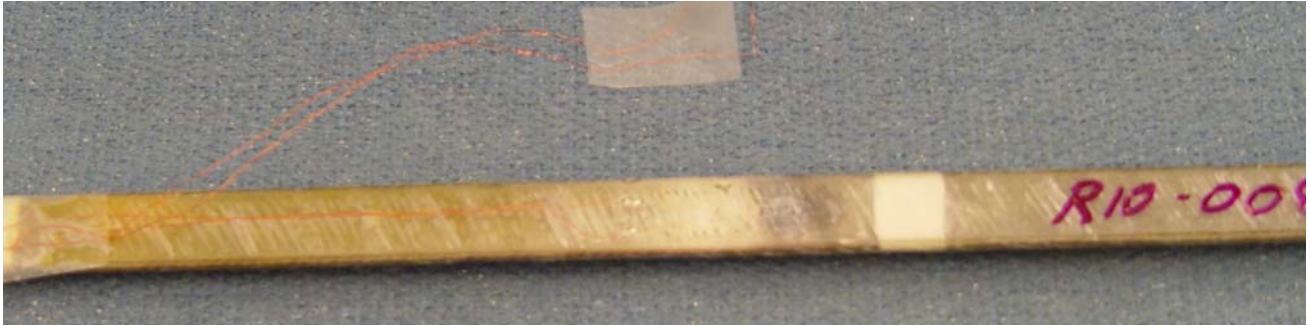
After wrapping with shrink wrap, the cable is heated with hot air to shrink the tape around the assembly before being epoxy impregnated.
